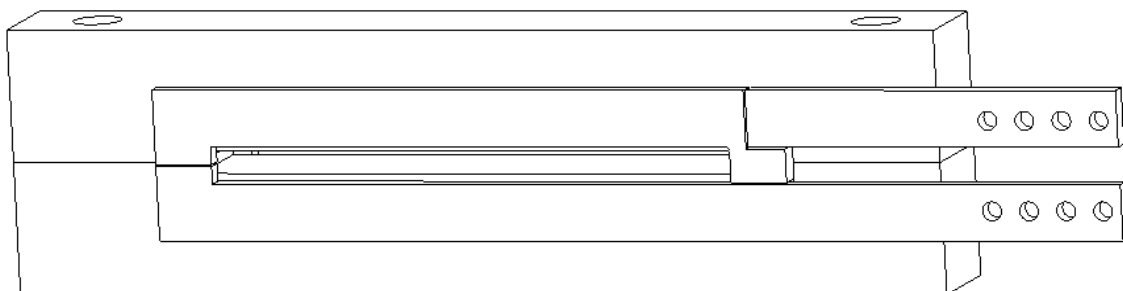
Assembled view of chicane magnet (yoke bolts not shown)
